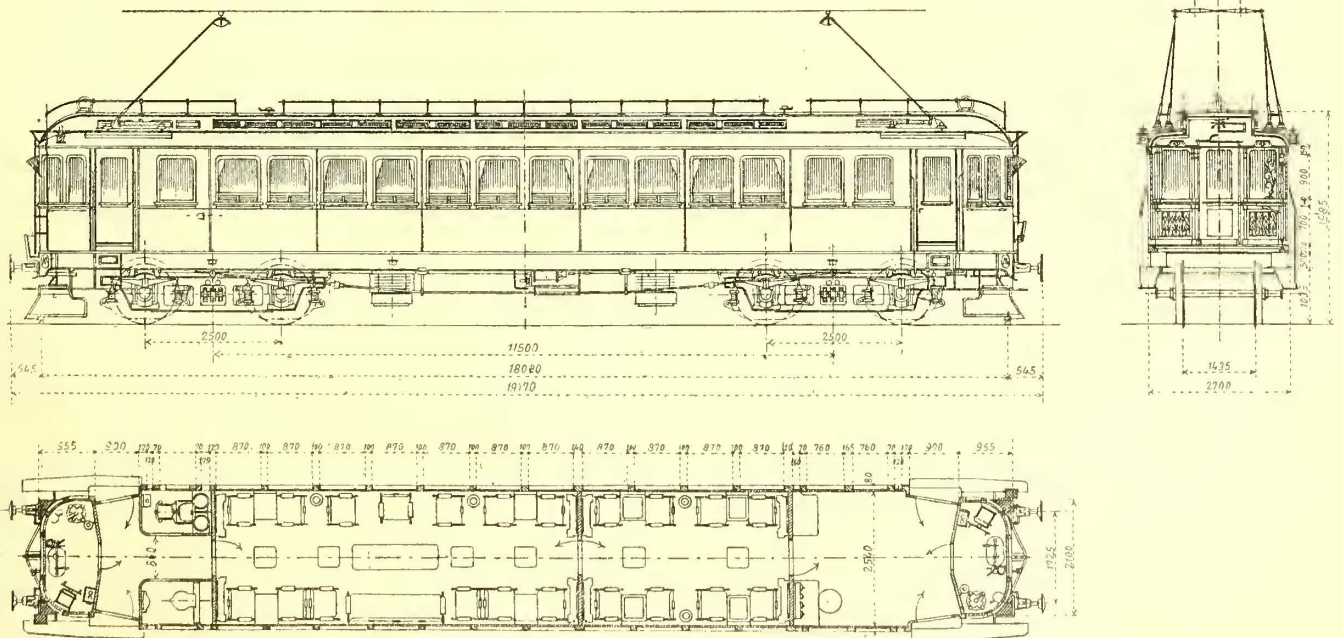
PLAN AND ELEVATIONS OF MOTOR CAR
